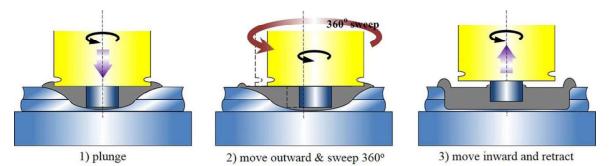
Scheme of the Swept FSSW welding procedure [6]
